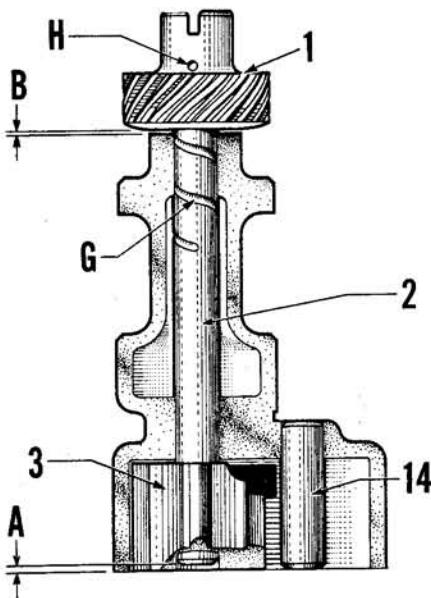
Cross-sectional view of late type pump showing driveshaft with spiral groove (G) at upper end and drive gear (1) with oil hole (H). Refer to text for installation of idler shaft (14) and for drive shaft to driven gear assembly dimension (A) and drive gear to body clearance (B).
